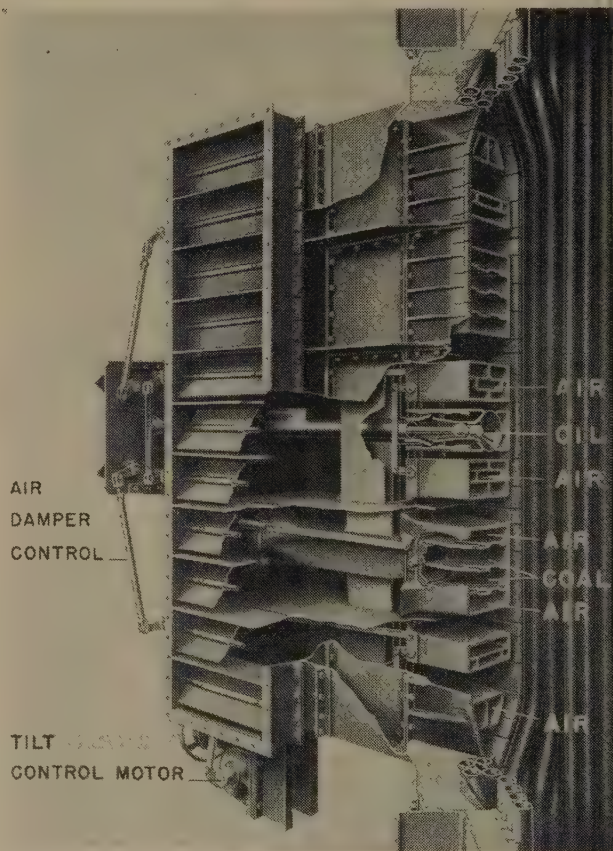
TYPICAL BURNER FOR CORNER FIRING, ILLUSTRATING PIVOTED FUEL AND AIR NOZZLE TIPS, TILTING MECHANISM, AND AIR-DAMPER OPERATING MECHANISM
